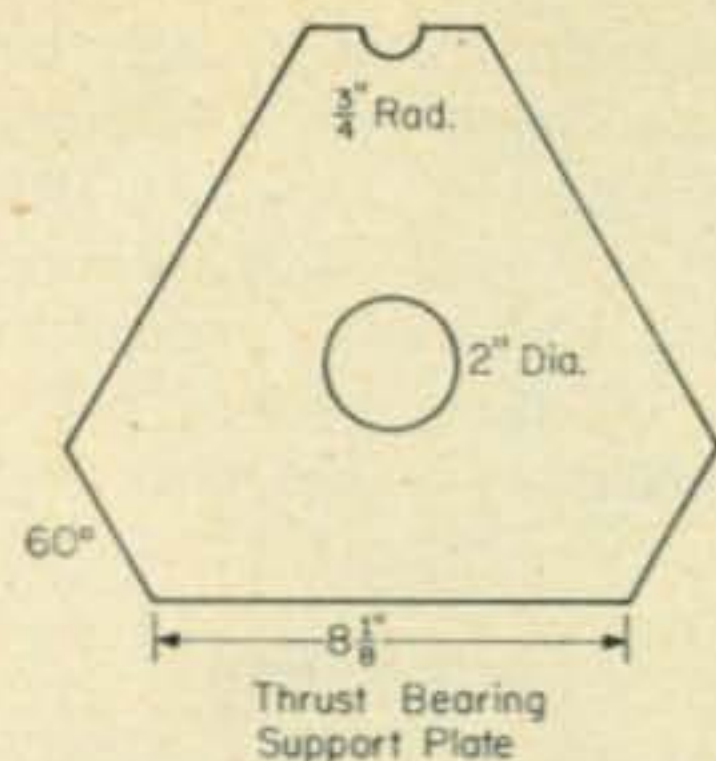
Details of the thrust bearing support plate fabricated from $\frac{1}{4}$ " mild steel.
